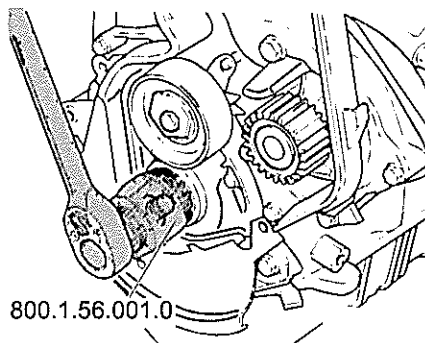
Crankshaft oil seal – belt pulley end (removal)
